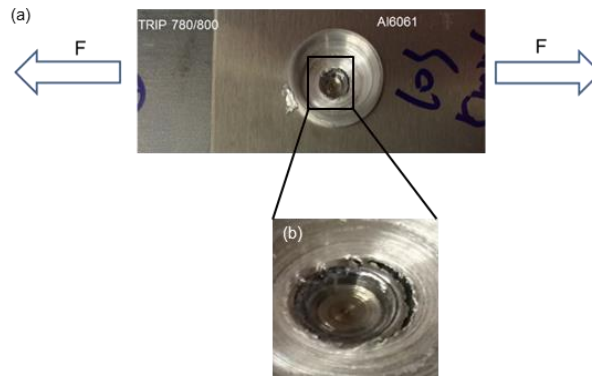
(a) Failure happened at the tensile side while the compressive side is still connected (b) Enlarged view of the fracture region
